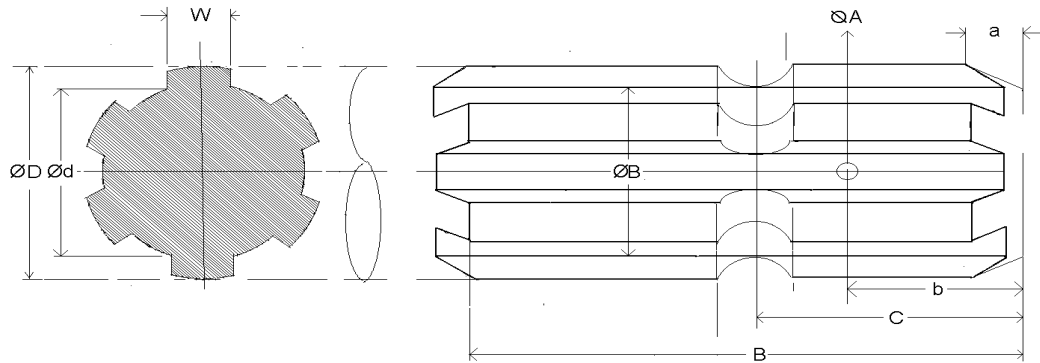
(a): DIMENSIONAL NOTATIONS FOR TYPE-I POWER TAKE-OFF SHAFT
